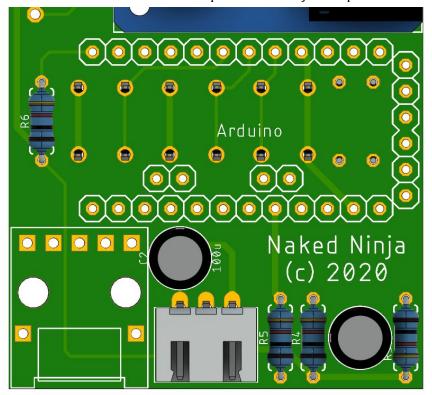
Back view of VU Stick V1.2 PCB with capacitor C1 and C2 placed and soldered
